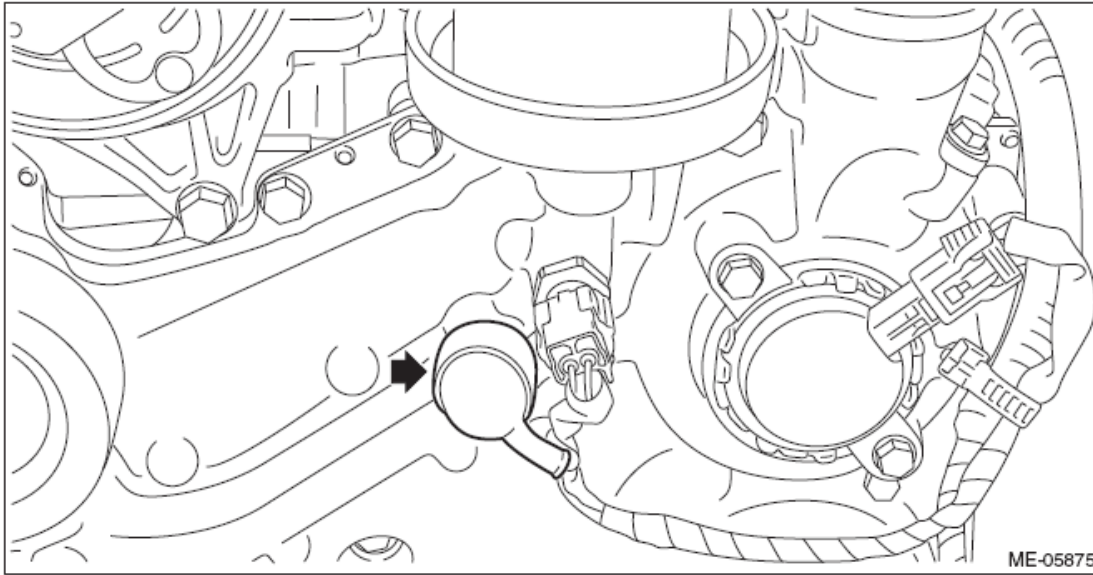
Locating Oil Pressure Switch Rubber Cap
